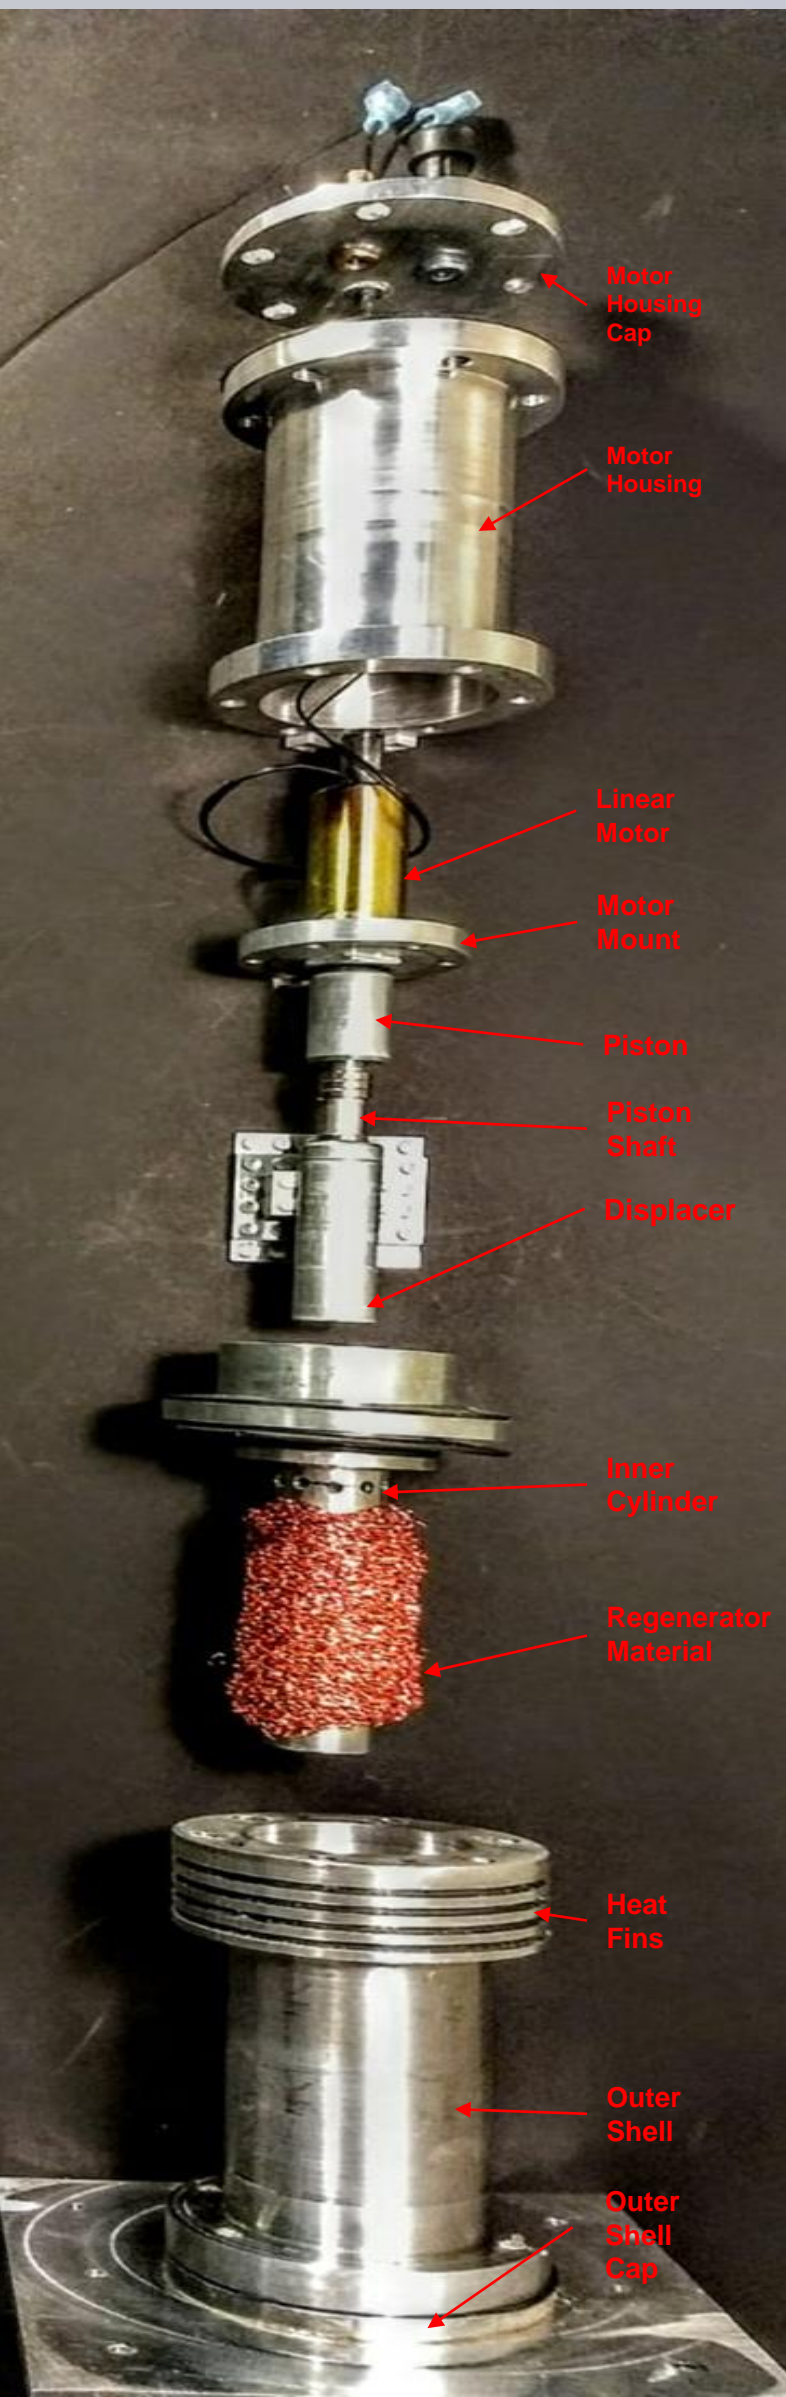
Final motor cooler assembly. Exploded view to show internal parts.
